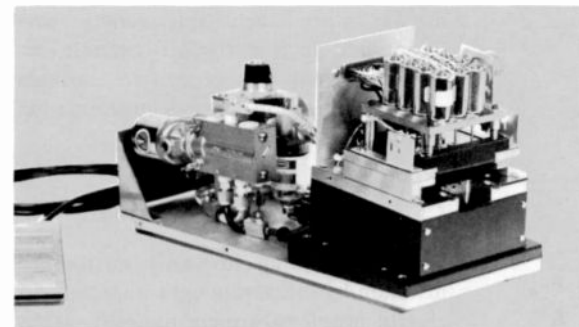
The fixture, which contains the twelve actuator solenoids, automatically starts the test sequence and ejects the part upon test completion.
